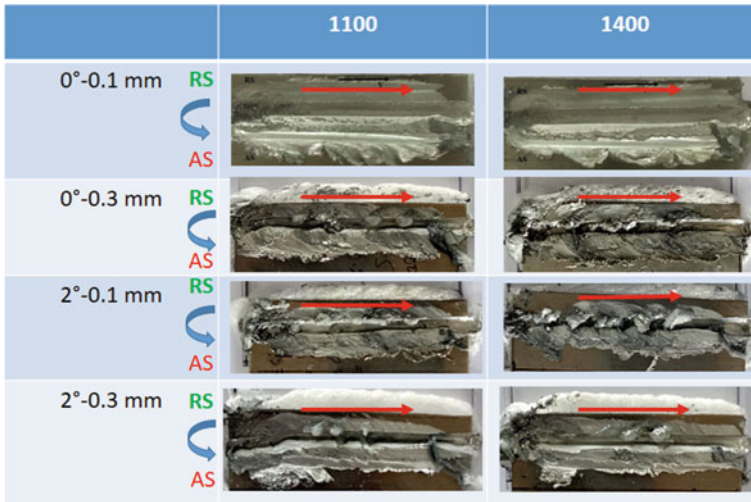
Weld bead profiles at different parametric conditions
